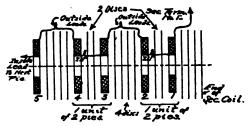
METHOD OF ASSEMBLING SECONDARY SECTIONS OR "PIES"
